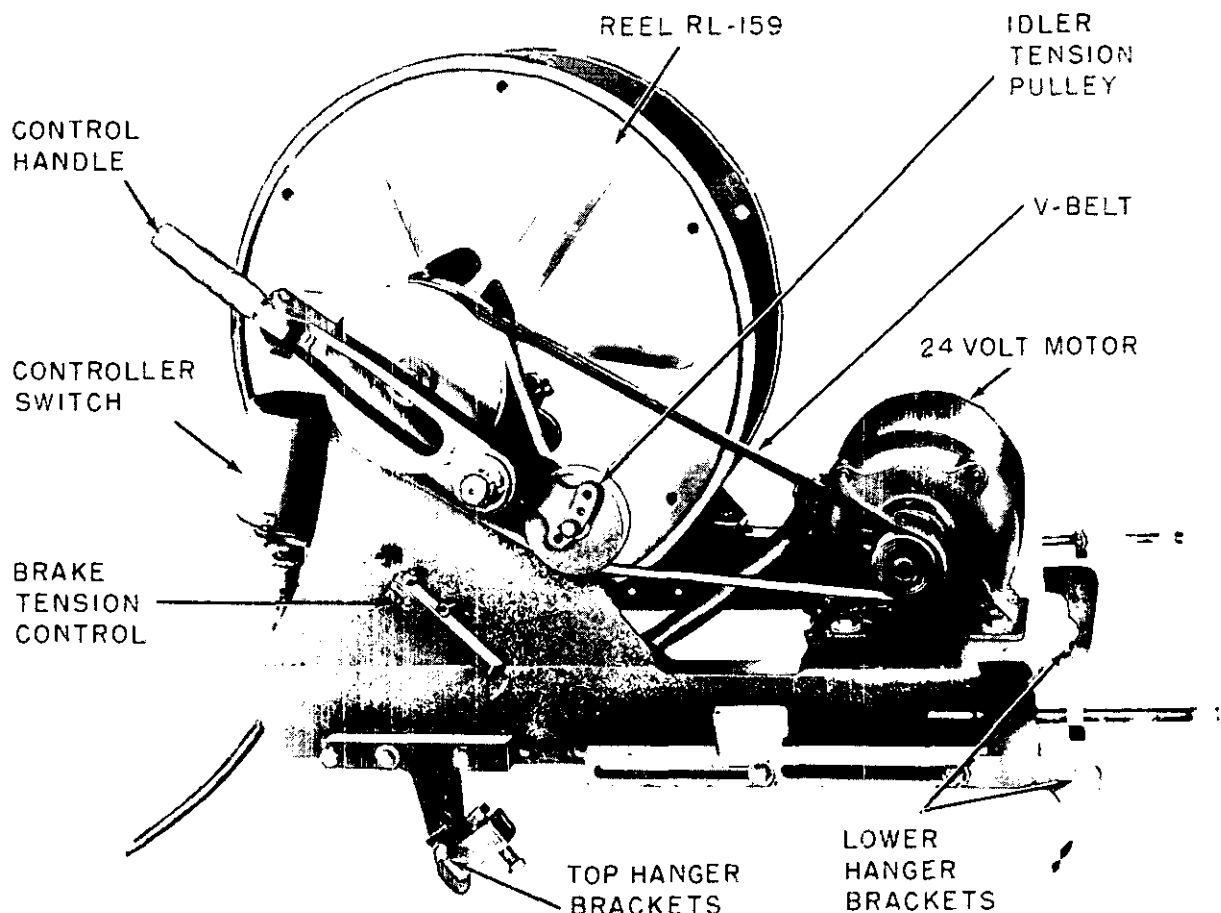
Cable reeling machine, motor-driven RL-172/G.
